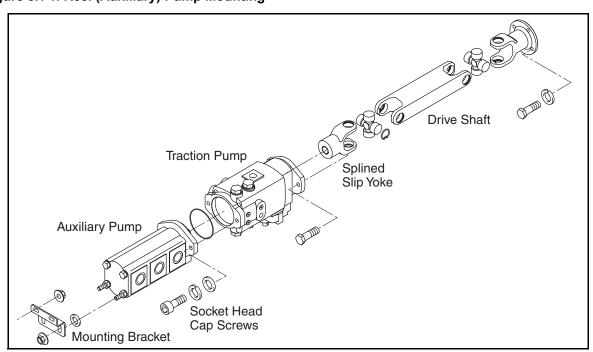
H-2. Reel (Auxiliary) Hydraulic Pump Mounting
